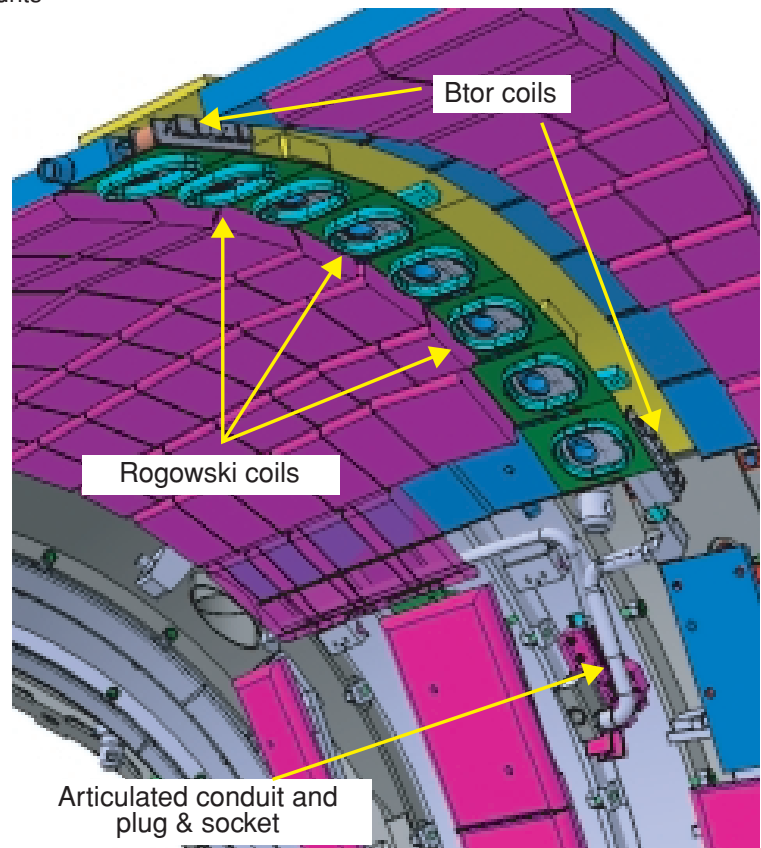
CAD image of the sensor support structure installed in the vessel with the complete cable conduit up to the port. The CFC tiles have been removed for clarity.
